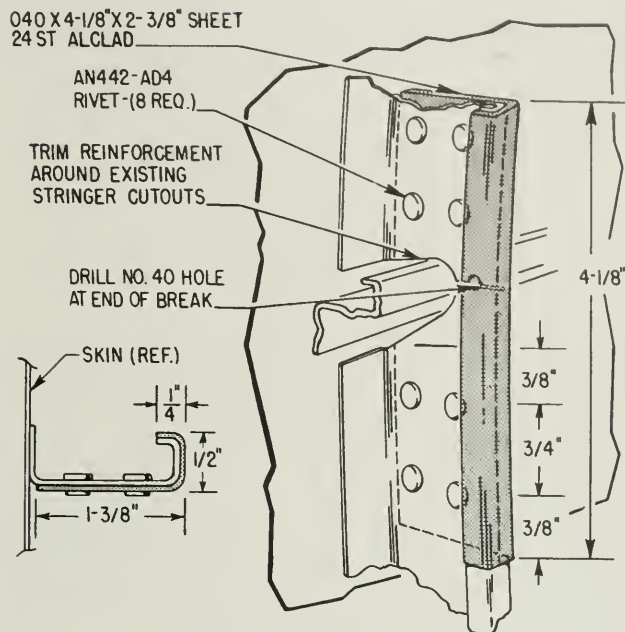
Splice of Rear Four Formers of Front Fuselage Side Panels
